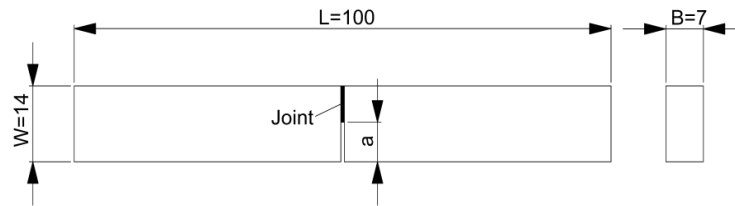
Fracture specimen geometry with the crack length a (dimensions in mm)
